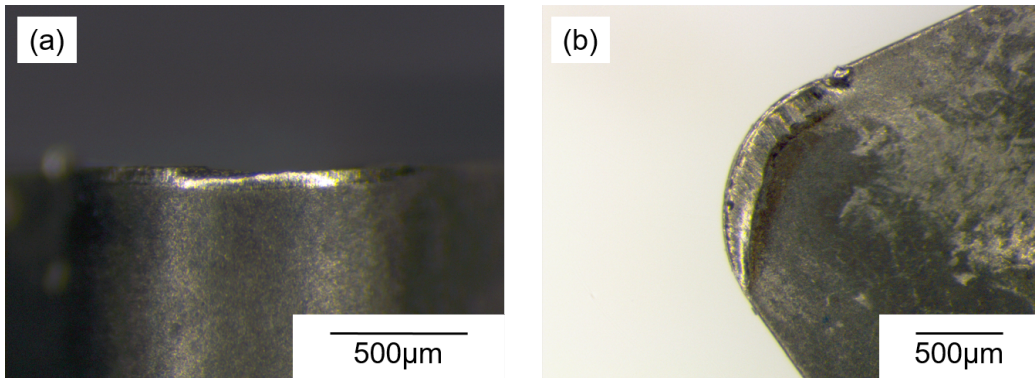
Microscope images showing the degree of tool wear after trial 2.1.2 on the as-HIP billet. Showing (a) the flank face and (b) the rake face.
